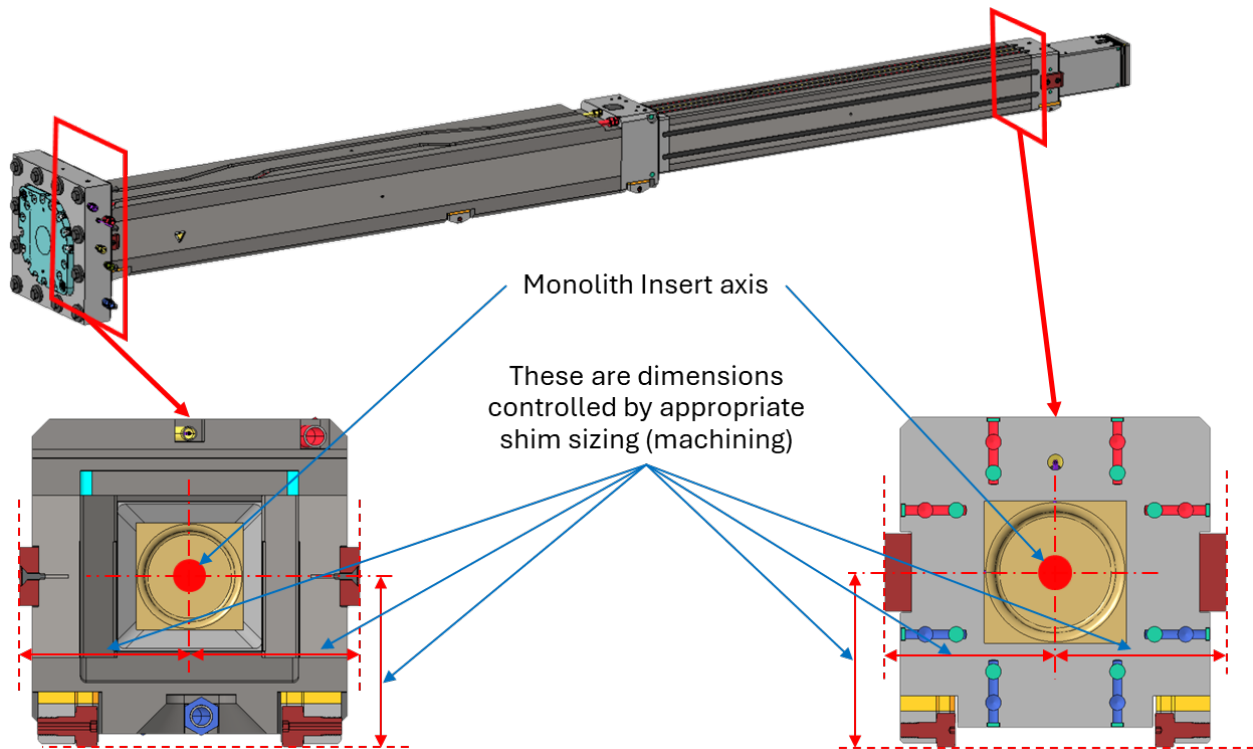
Section view of the Monolith Insert at each shim location showing the dimensions controlled by the shim sizing
